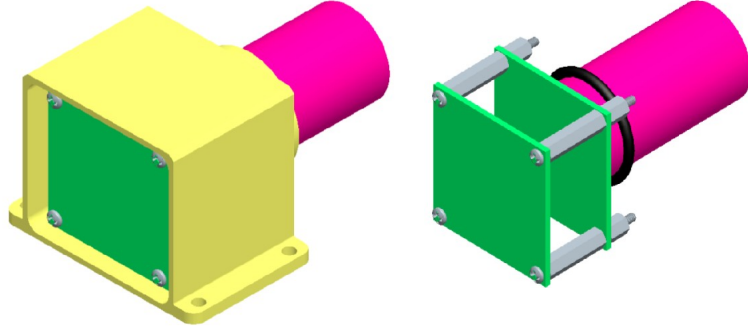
CAD drawing of a BSD trigger PMT assembly with (left) and without (right) its aluminum enclosure.
